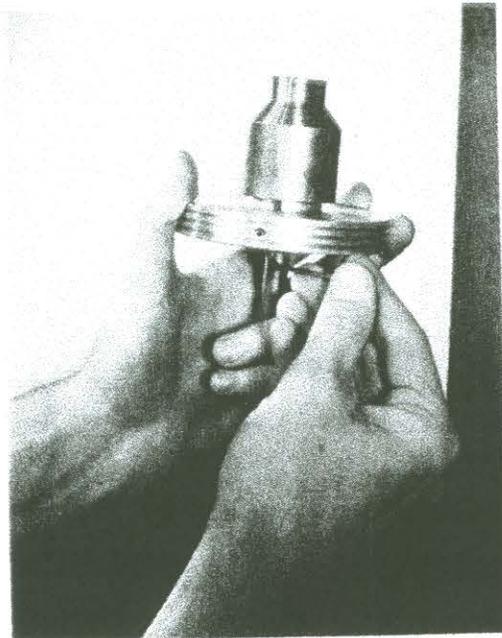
ALIGNING THE DIAPHRAGM CLAMPING BASE
